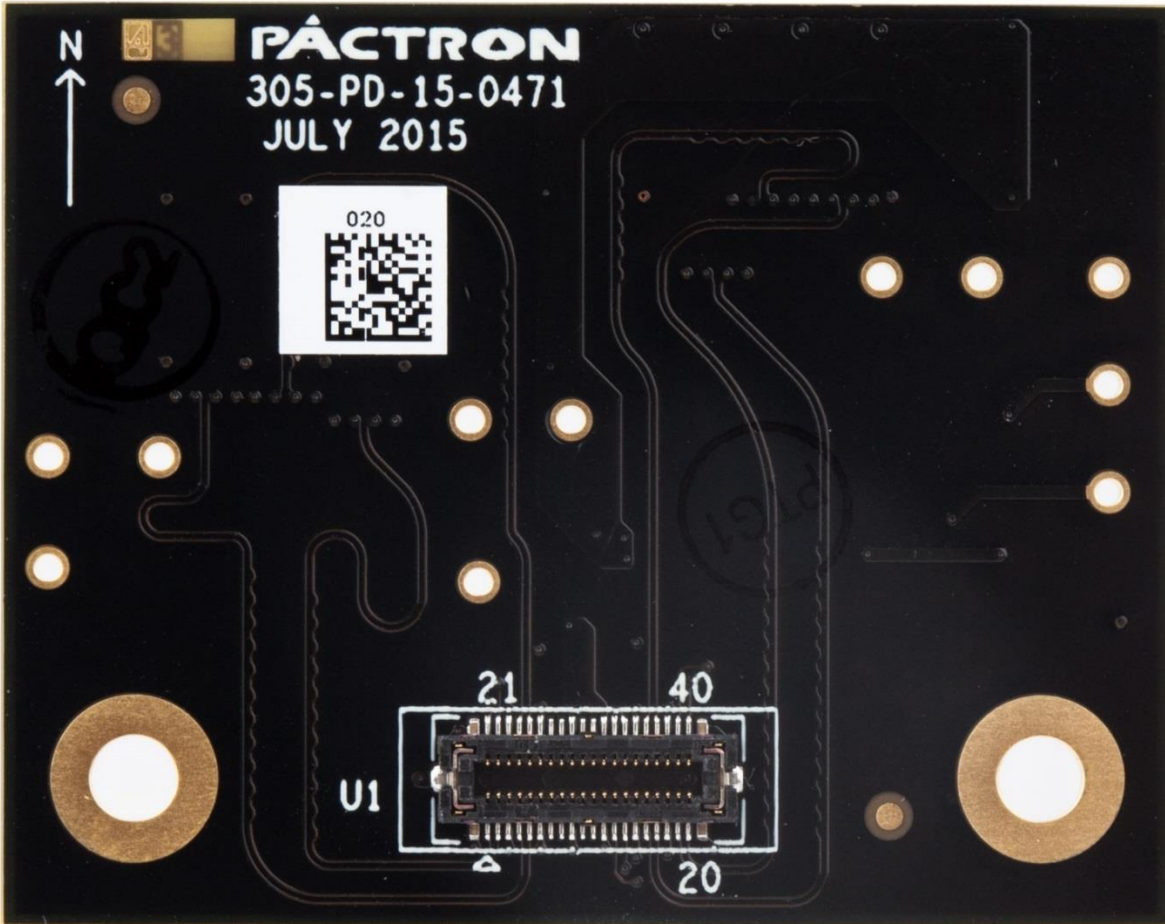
Bottom View of Raspberry Pi Camera Link Board
